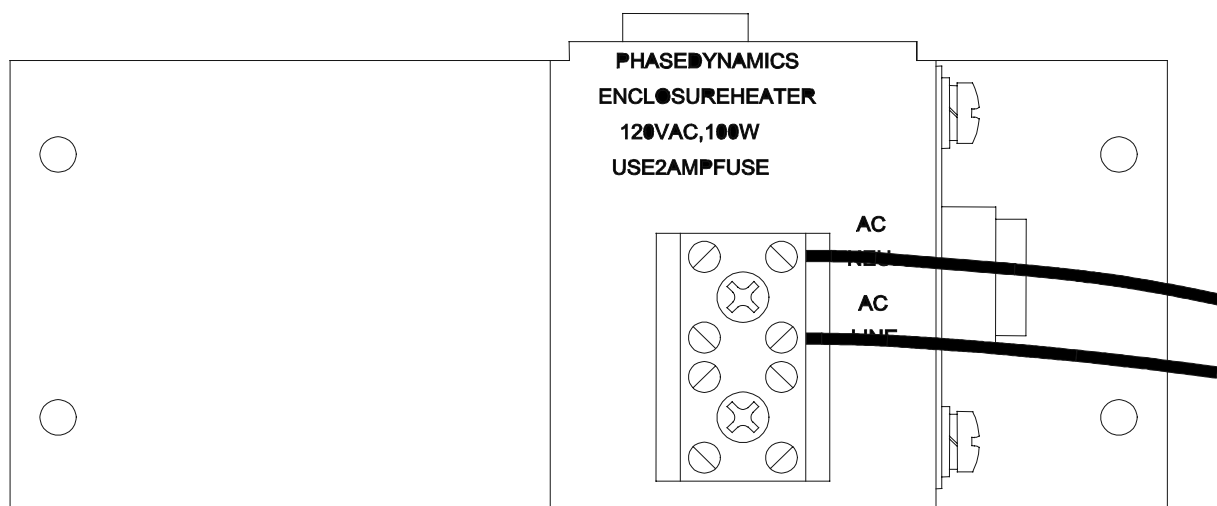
(a) 120 VAC Heater Assembly Terminal Block Showing User Supplied Wiring
